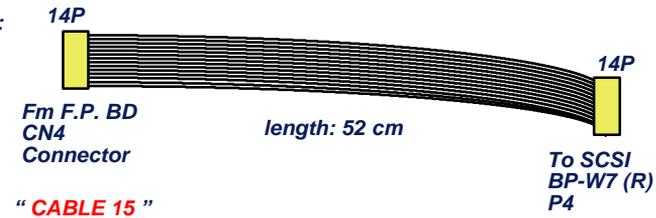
33 Cables 14 and 15 Definition for the SCSI Backplane Board
